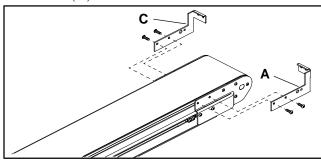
3100 Series Conveyor End Stop Plate Installation Detail
